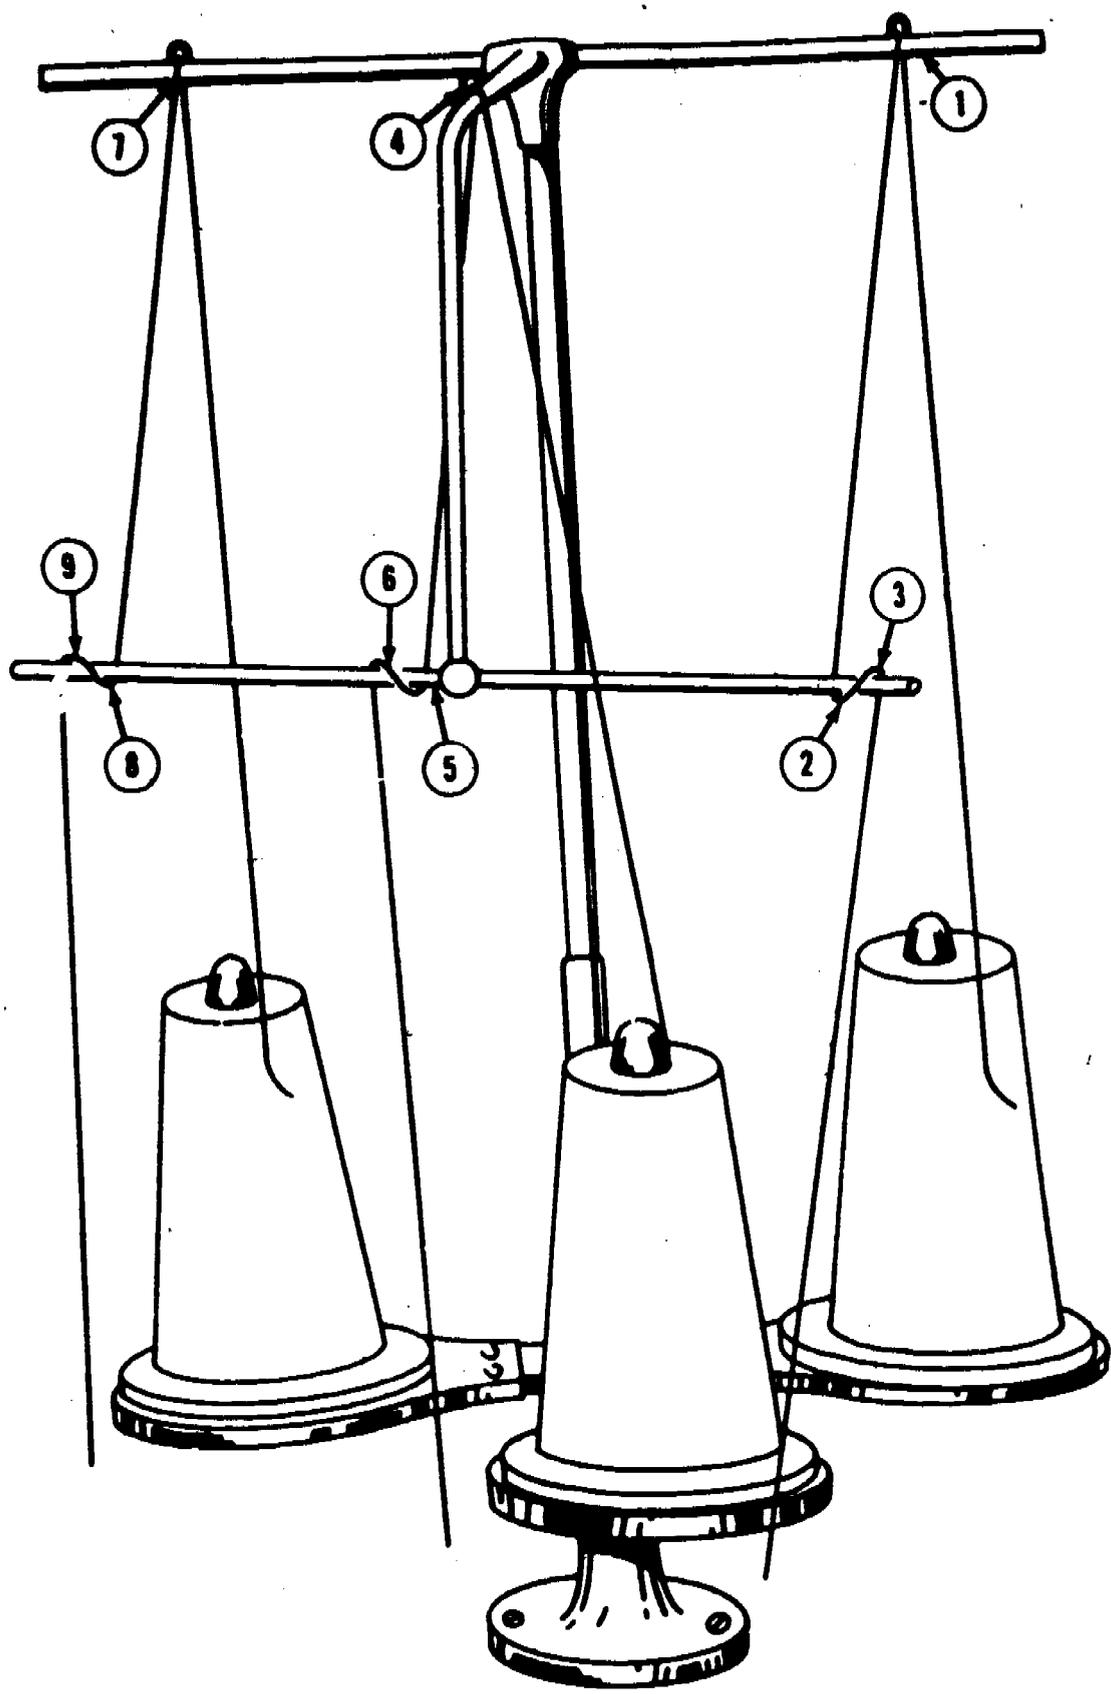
Threading sequence for unwinder (overedge sewing machine).
